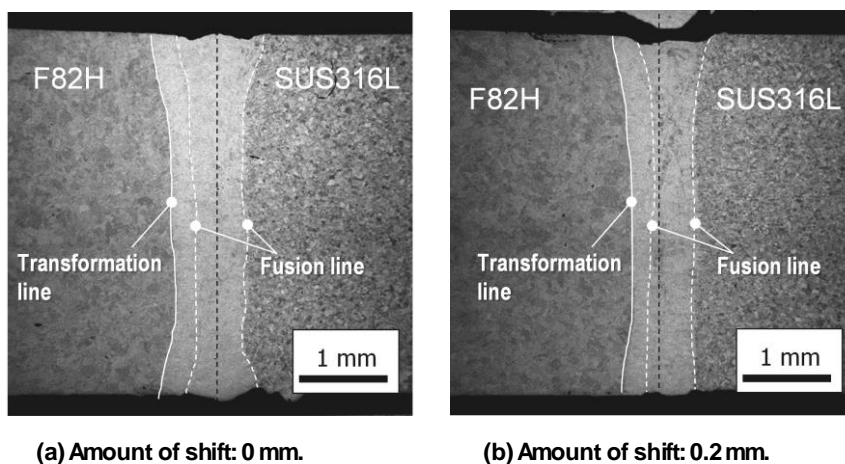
Cross-sectional microstructure of F82H/SUS316L welded by 4kW fiber-laser welding. Beam position were shifted from the abutting surface (broken line in the figures) to SUS316L side.
